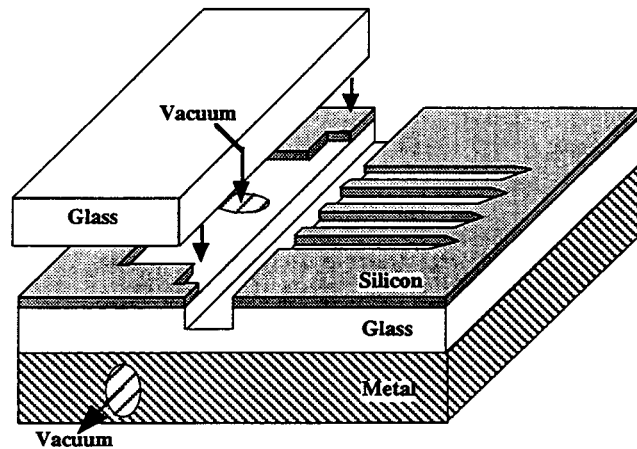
Perspective view of a micromachined assembly fixture used for bending the beams on probes intended for use in 3D microassemblies.
